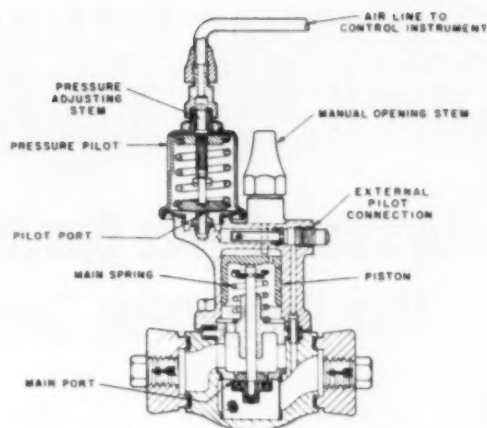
Evaporator pressure regulator with pneumatic adjusting feature.
